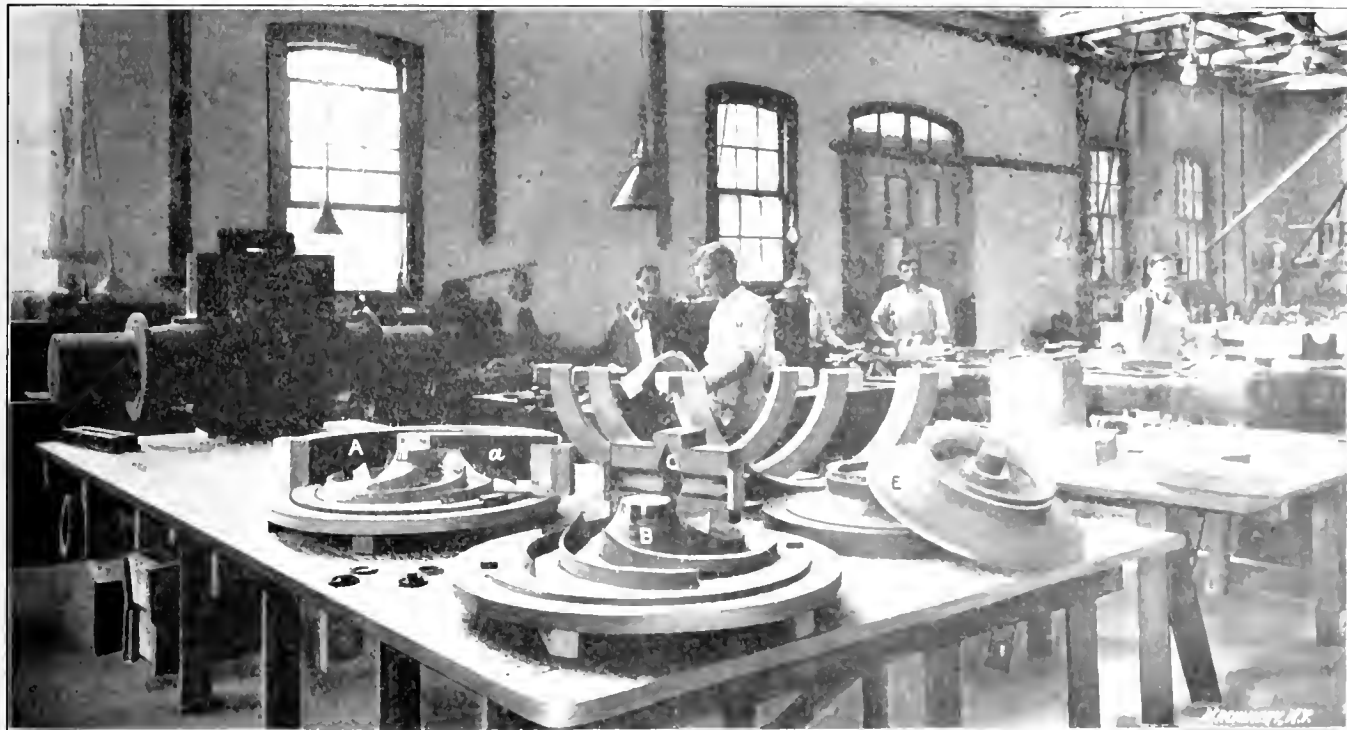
View in Pattern Shop showing Patterns for a Centrifugal Pump Wheel
